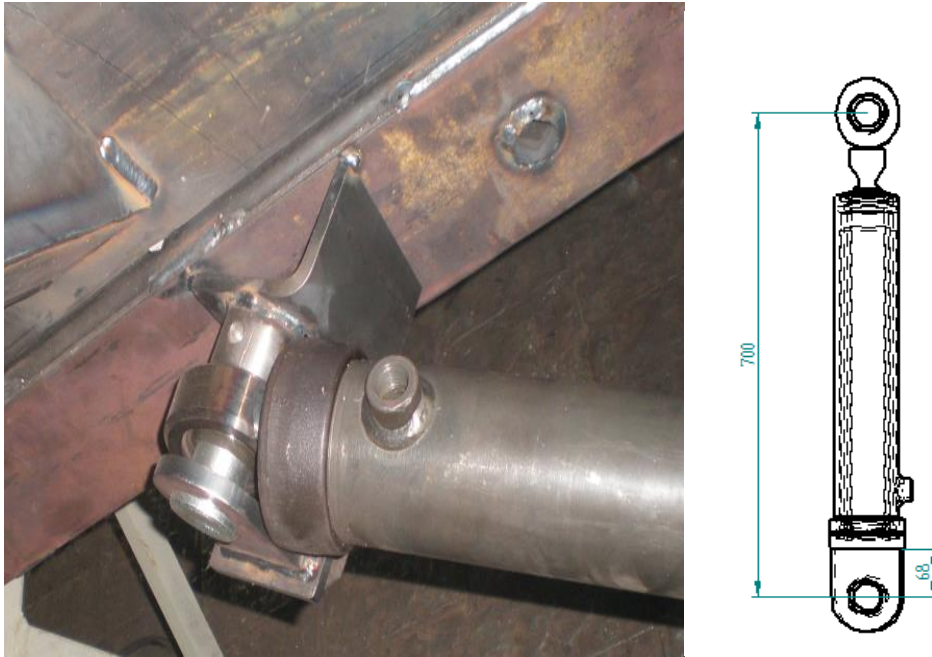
Cylinder fastening unit construction and drawing of cylinder
